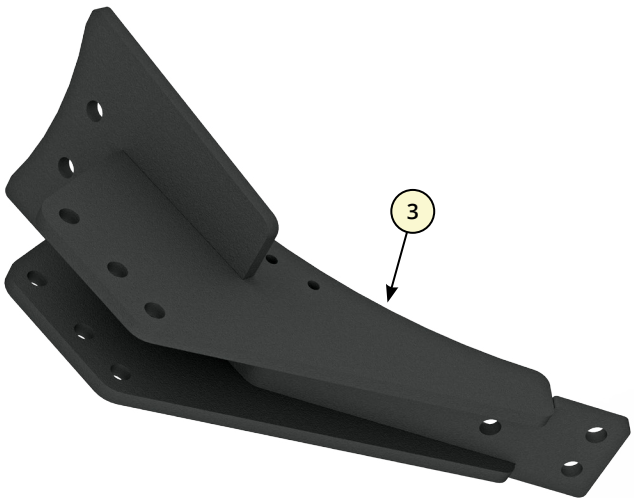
RH Lift Lug Attach Bracket (bottom view)
